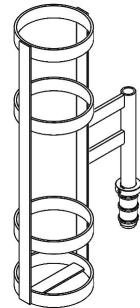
Installing the oxygen bottle holder (MM061/MM062/MM063)
